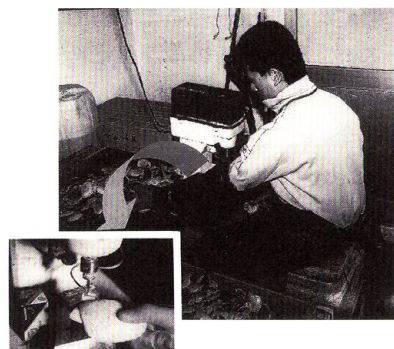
Picture of a worker operating a half automatic drilling-machine.
